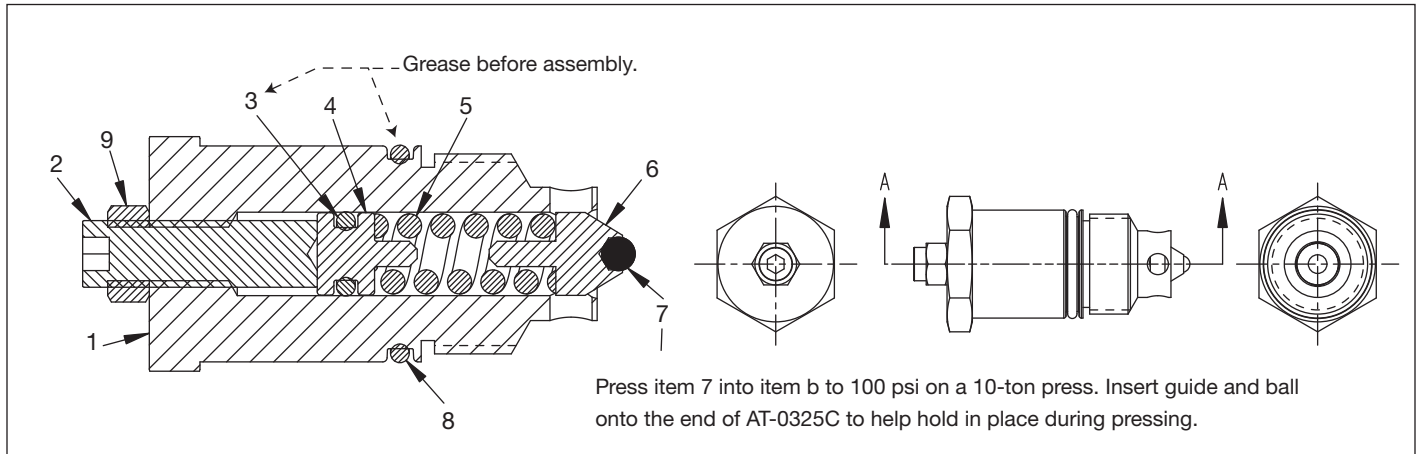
, User-Adjustable Relief Valve Assembly, DC5139900SR
